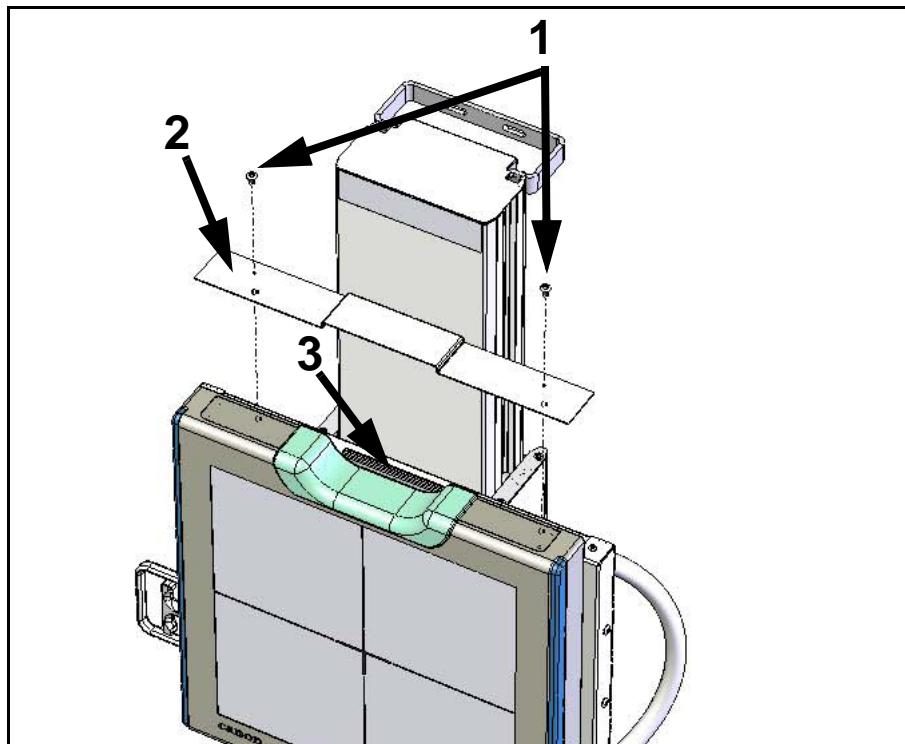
B-4. Vertical Carriage Assembly, Showing Weight cover.
